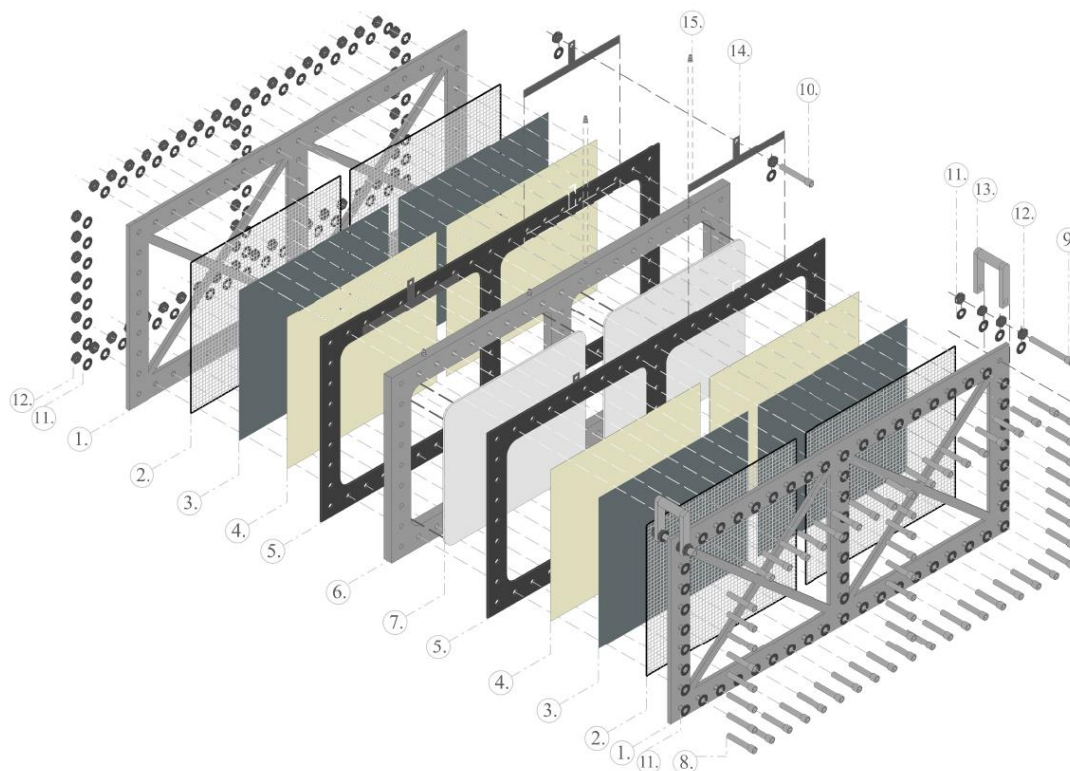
Exploded view of the M-MEC cassette prototype.
